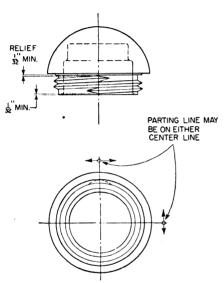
Casting of external threads is done with two side slides, each of which forms half of the thread circumference. When the slides are withdrawn, the casting is ejected in the usual manner.
